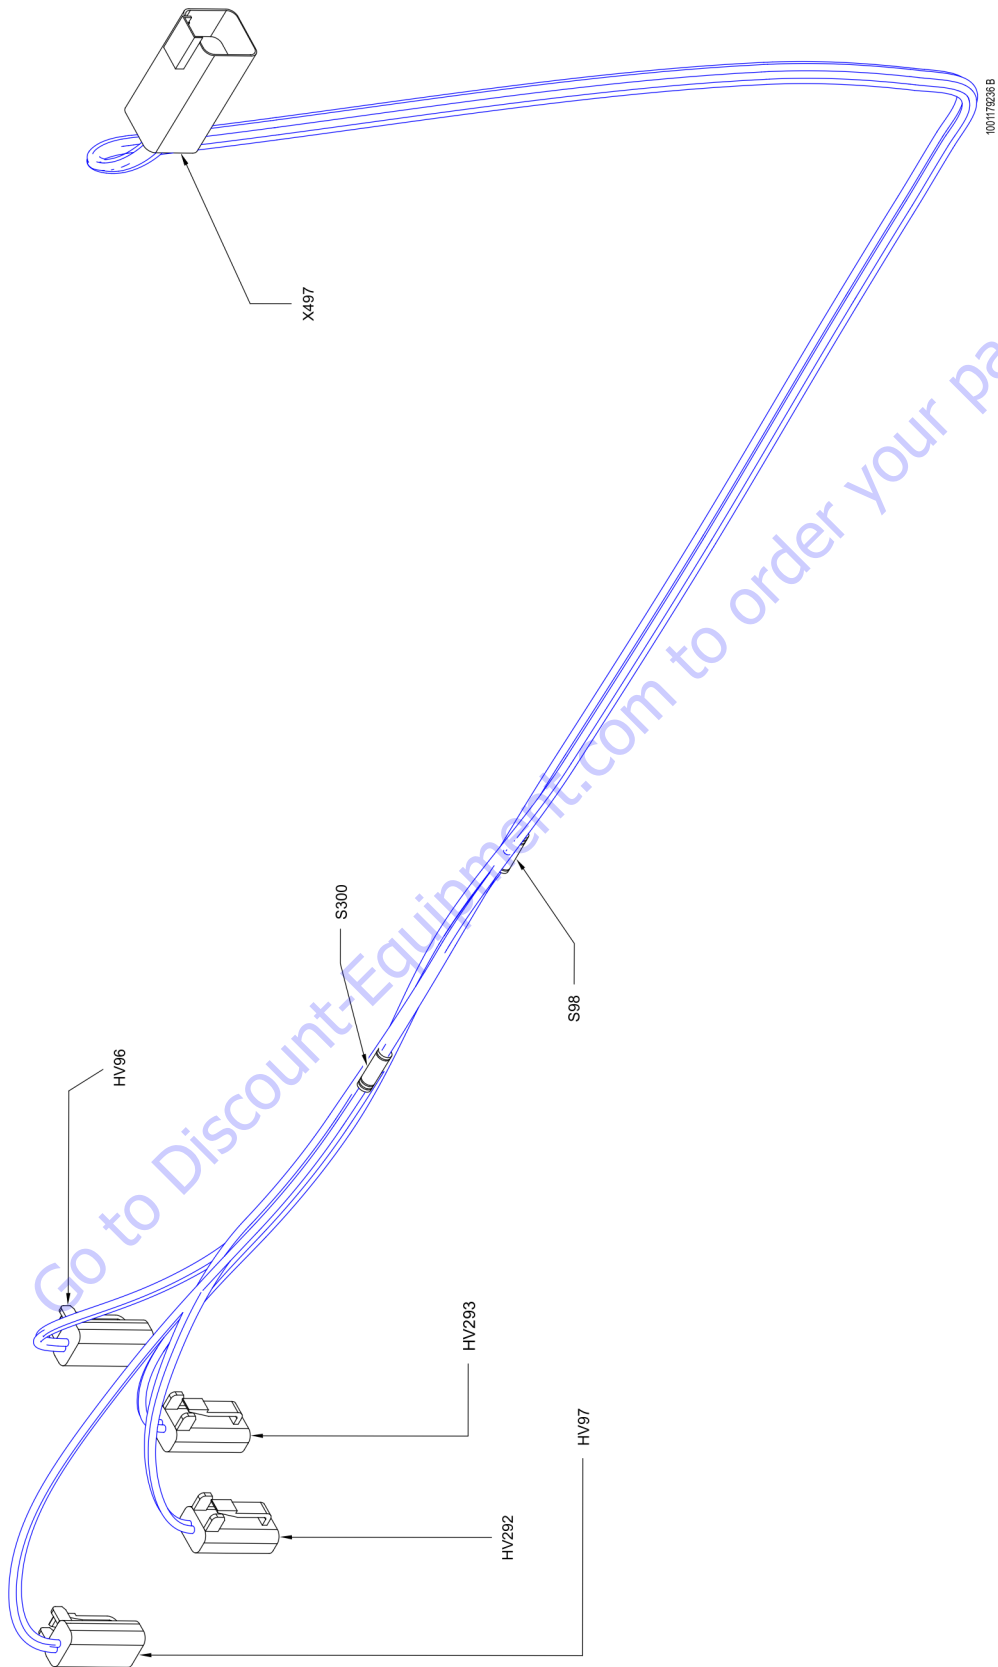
Chassis Solenoid Harness - Sheet 3 of 3
